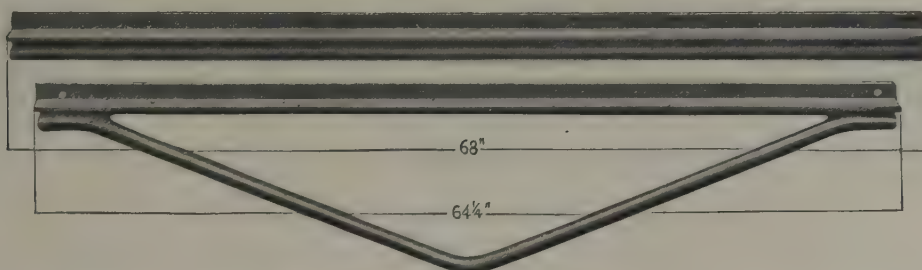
Method of Manufacture of Davis Solid Truss Brake Beam. Davis Brake Beam Company.
